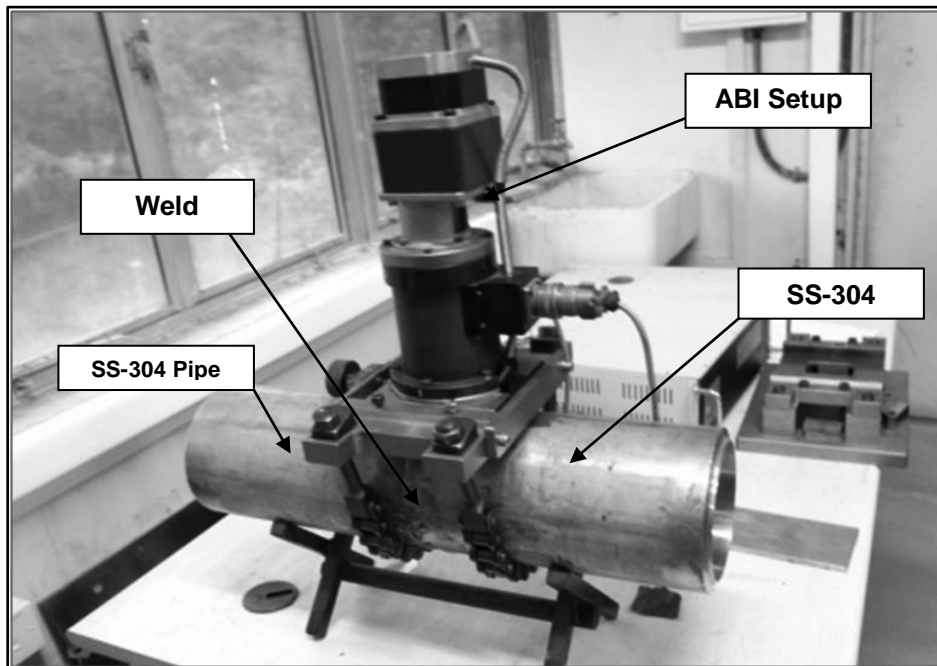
ABI Machine installed on two weld jointed pipes of SS 304 LN material
